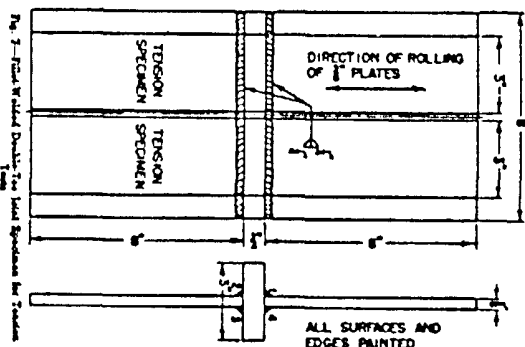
Fish-Bell Weld Double-Tee Joint Specimen for Tension Tests
